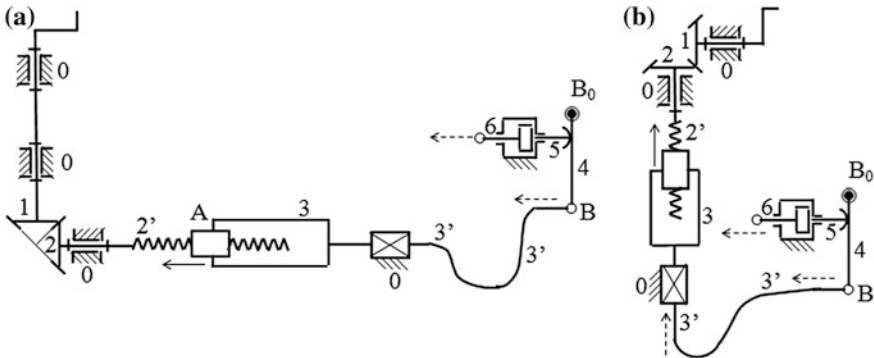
The kinematic schemes of the handbrake linkages with cable
